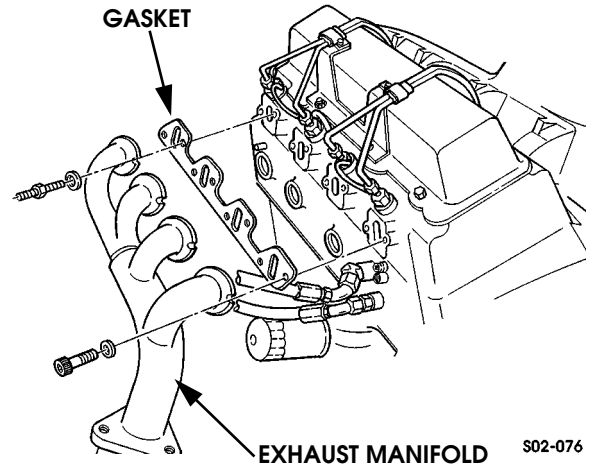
Left Side Exhaust Manifold and Gasket Removal
